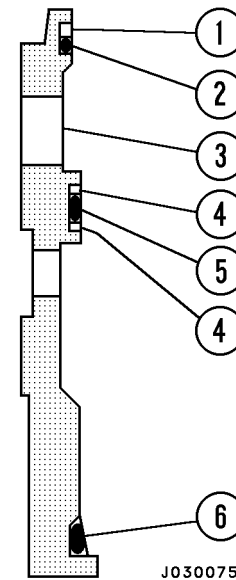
SLEEVE SEAL PLACEMENT
